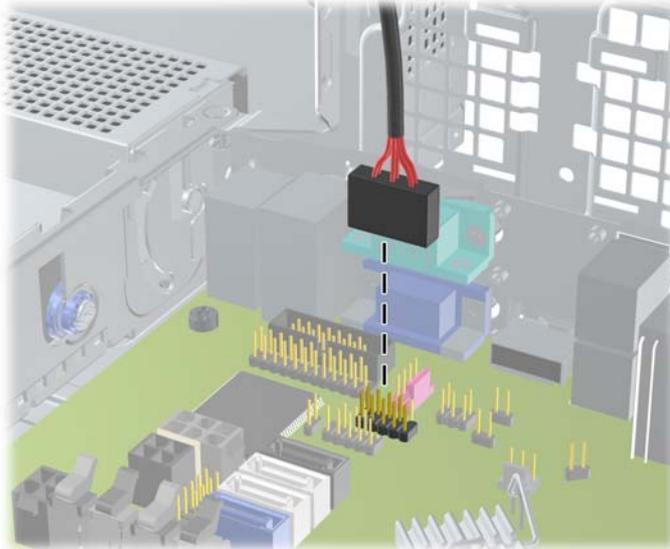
Installing a Drive into the 3.5-inch Drive Bay (Media Card Reader Shown)
